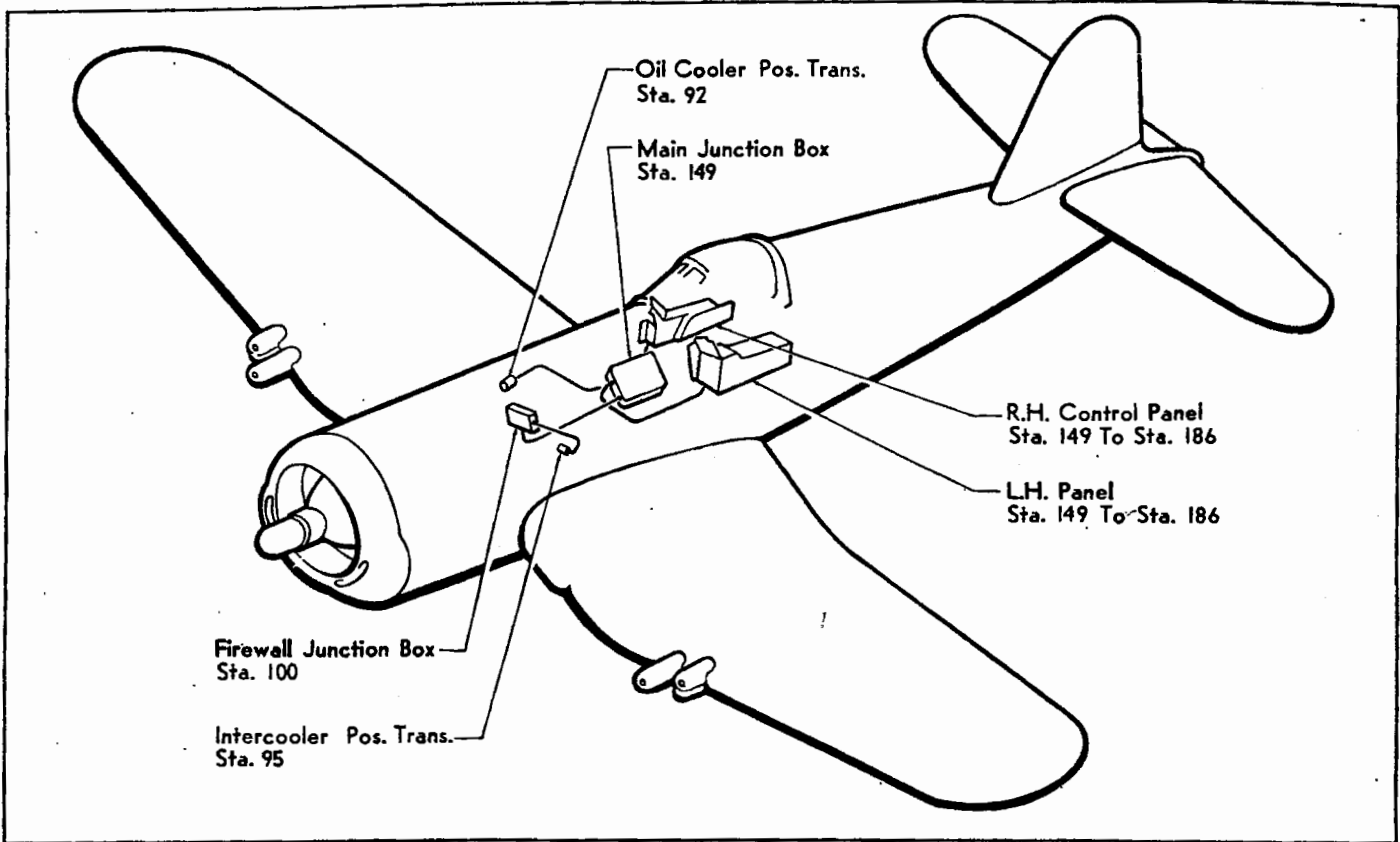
Engine Indicator Circuits—Intercooler Flap and Oil Cooler Doors Position Indicator.
